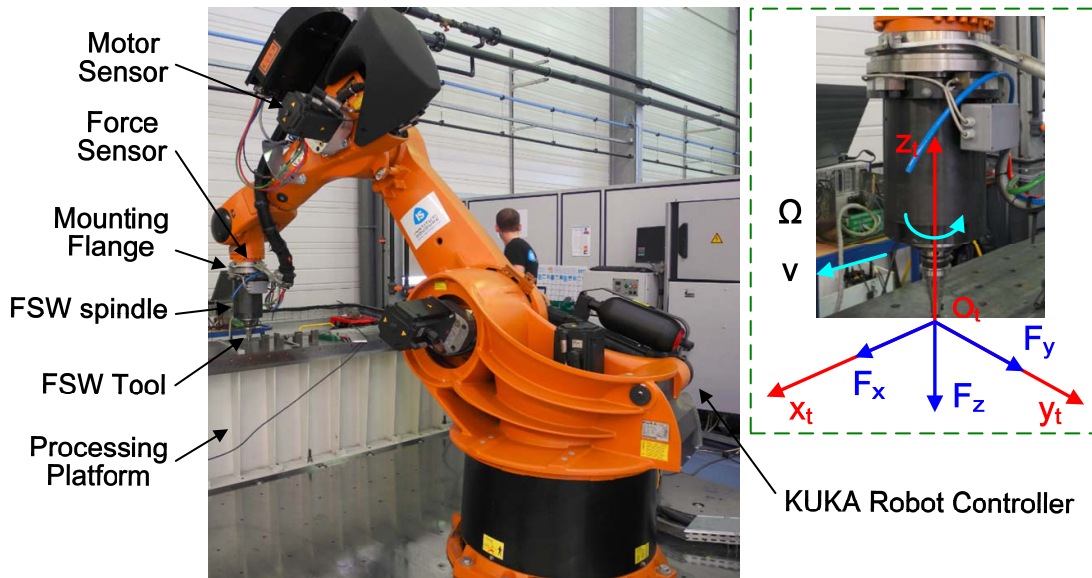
Experimental setup: FSW system based on robot KUKA KR500-2MT (by courtesy of Institut de Soudure, Goin, France)
